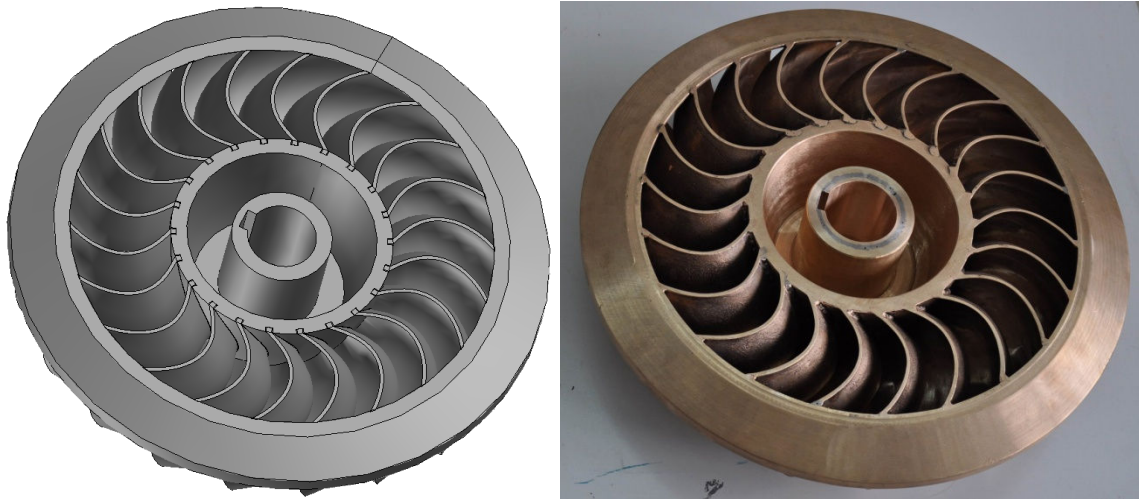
Left: Turgo runner 3D CAD drawing. Right: Actual runner assembled.
